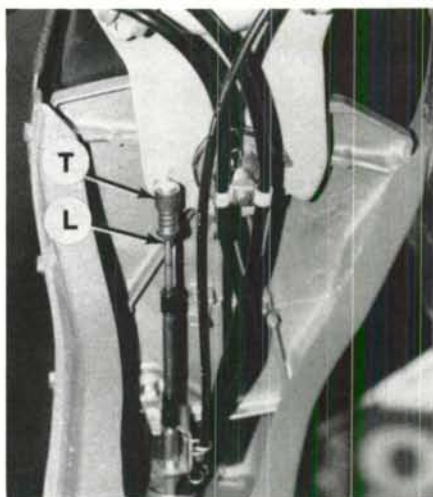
Loosen locknut (L) and remove joint (T) from ball joint on handlebar pivot plate and rotate joint (T) up or down on threaded end of steering cable as needed to center jet pump steering nozzle when steering handle bar is in a straight ahead position.
